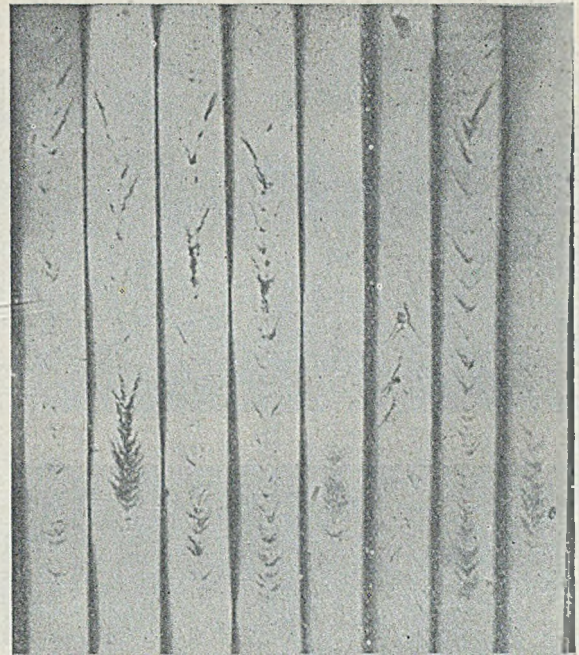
Transverse Radiographs of Casting Designs "A" and "B,"
